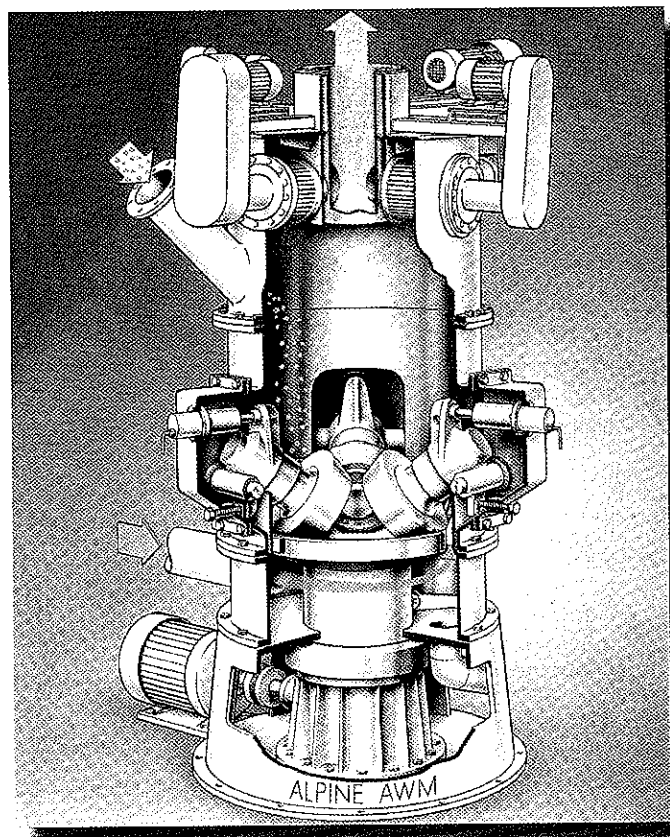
, right: Alpine Table Roller Mill with Multiwheel ATP classifier head
